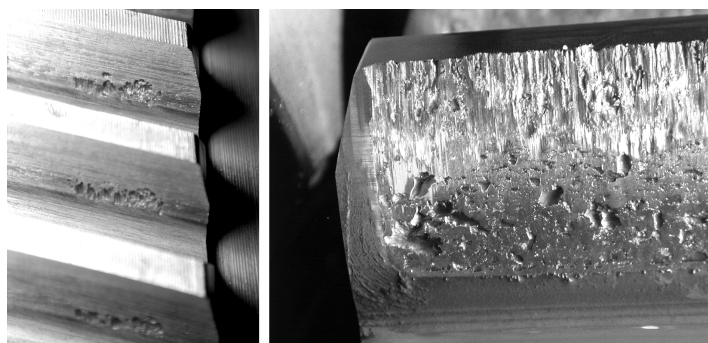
Pitting failure on one side of the gear due to the lack of parallelism of the shaft supports of a gearbox housing
